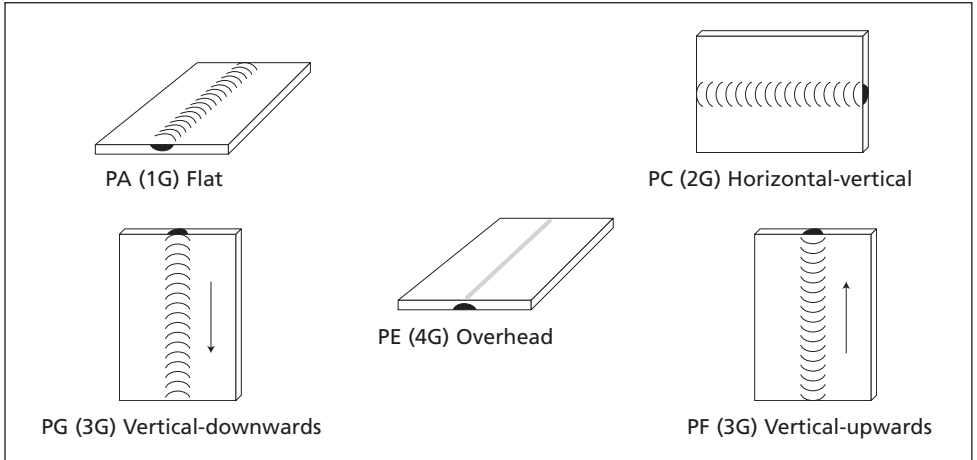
Welding positions for butt welds – EN 287-1 (AWS designations are given in brackets)
